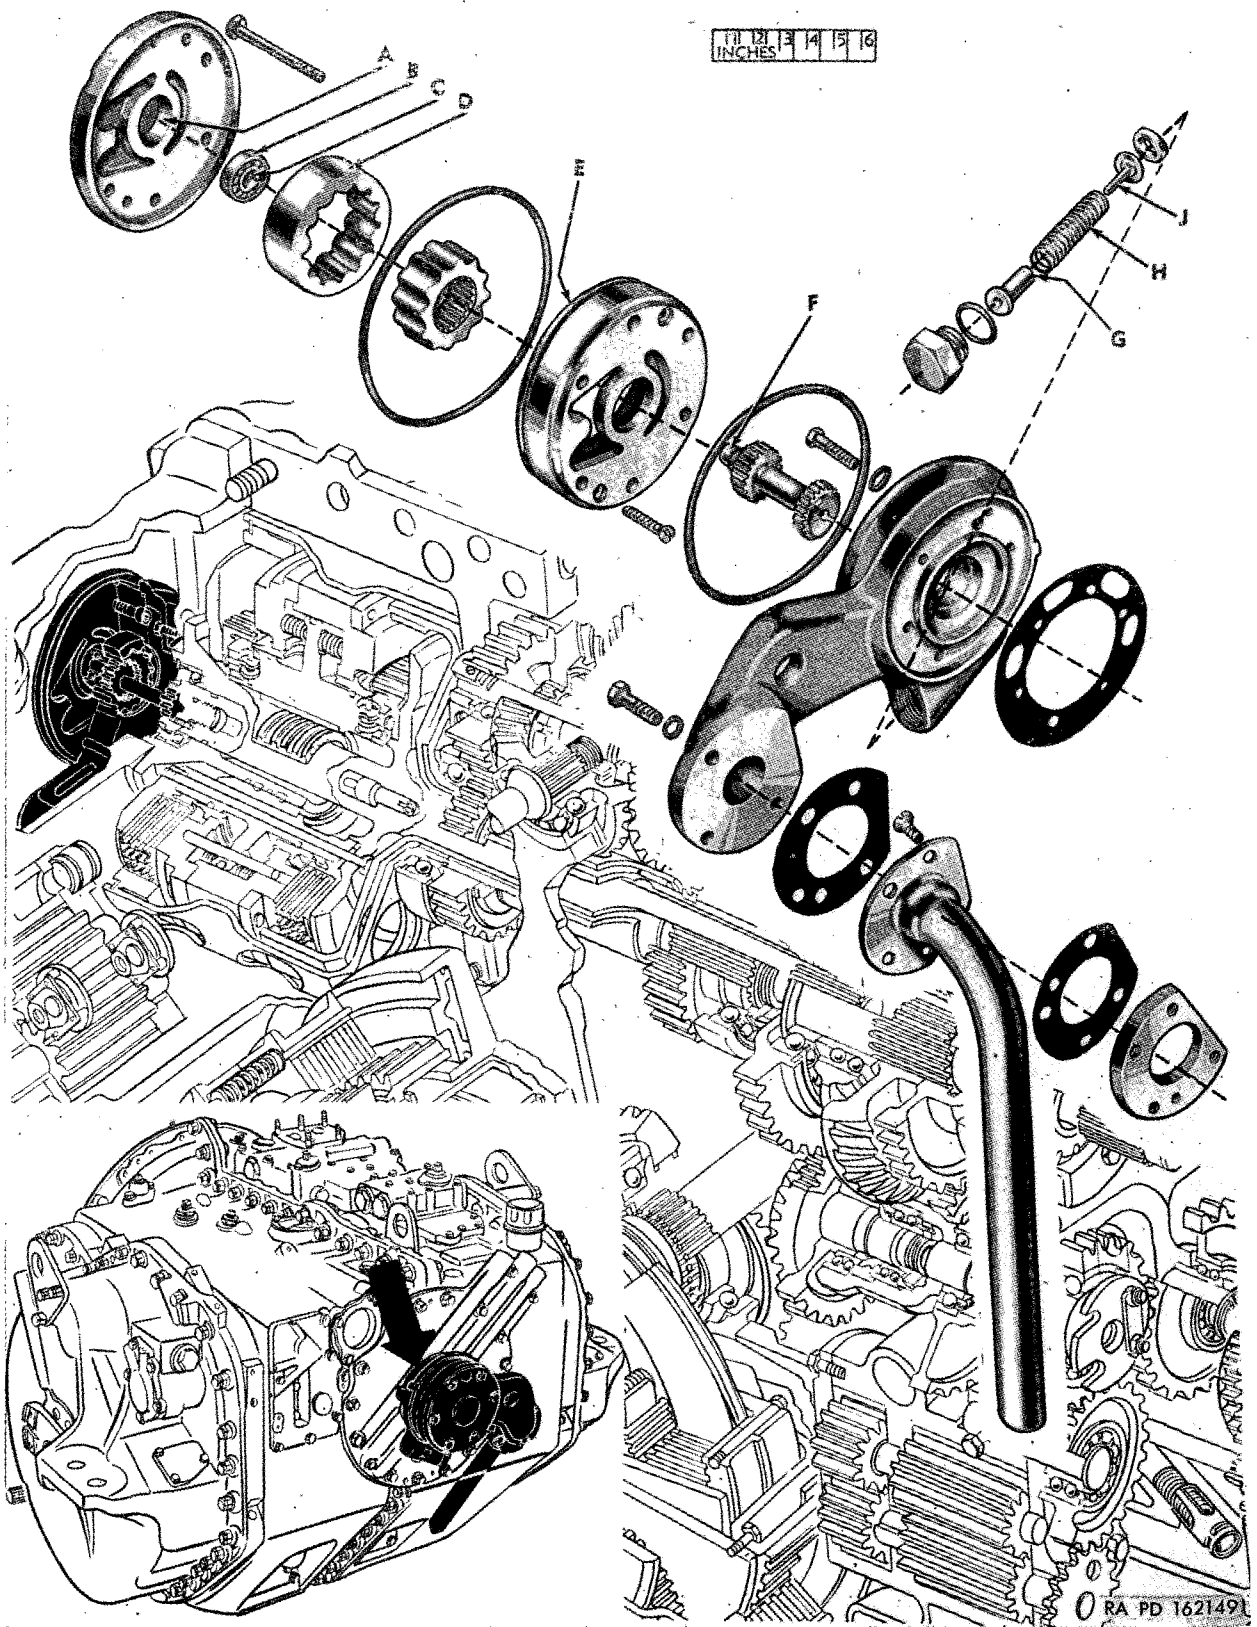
Serviceability standard points of measurement for steering clutch coolant pump and relief valve.
